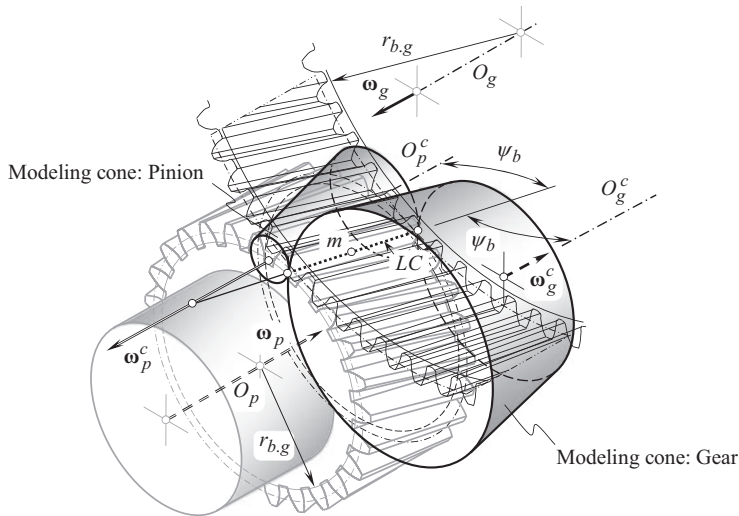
Modeling cones of gear tooth flank,  $\mathcal{G}$ , and mating pinion tooth flank,  $\mathcal{P}$ , in external parallel-axes gearing.
